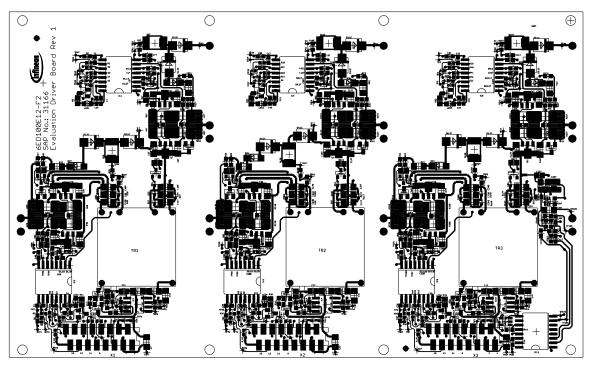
Assembly drawing of the EconoPACK<sup>™</sup> + driver board
